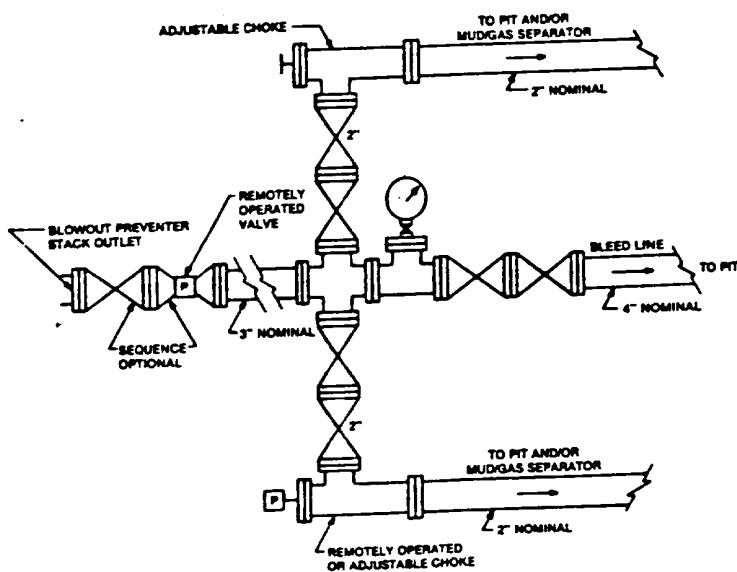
Typical choke manifold assembly for 5M rated working pressure service — surface installation.
